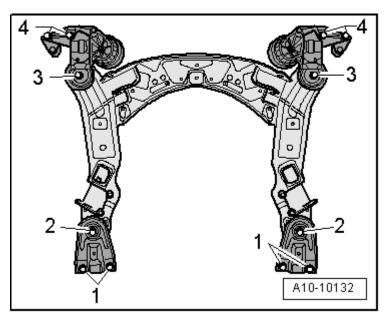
Engine Mount Plate Bolts Removal/Installing Sequence
